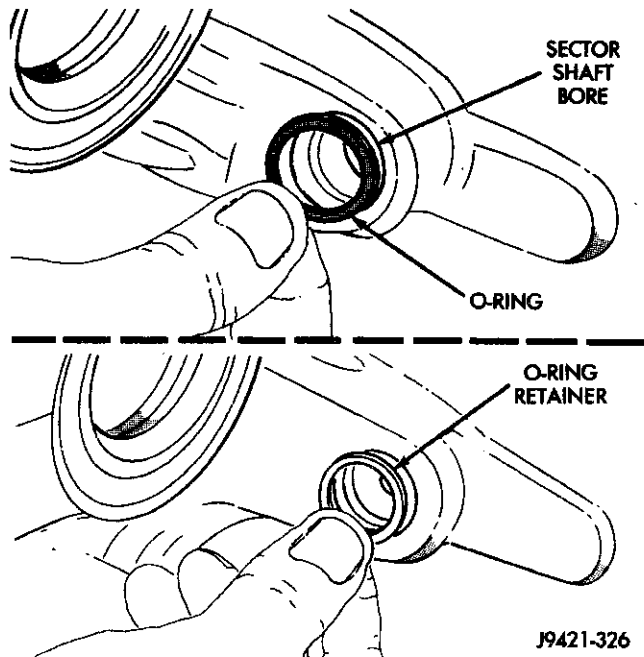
Sector Shaft O-Ring And Retainer Installation
